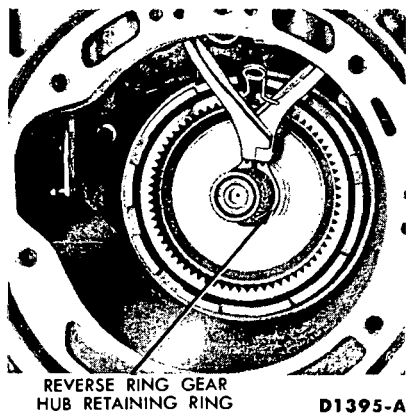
Removing or Installing Reverse Ring Gear Hub Retaining Ring
